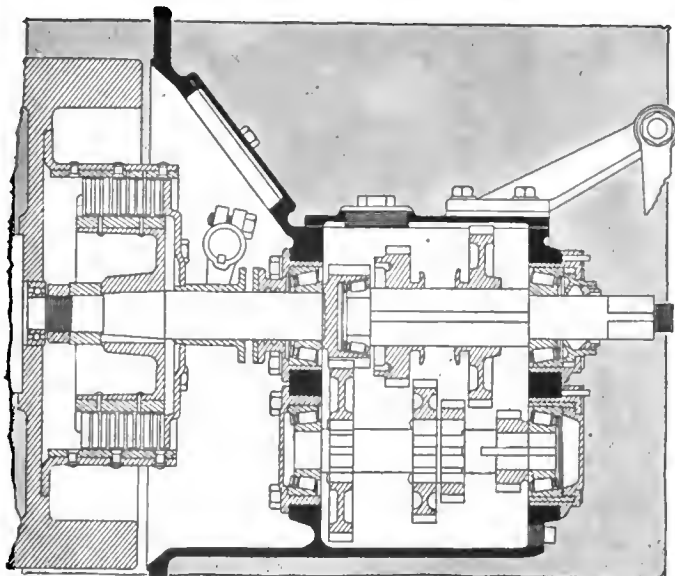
Brown-Lipe model 35 unit power plant gearset
